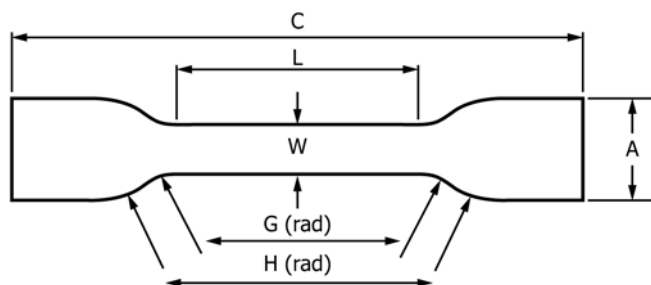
Tensile Dumbbell Specimen Dimension Key
